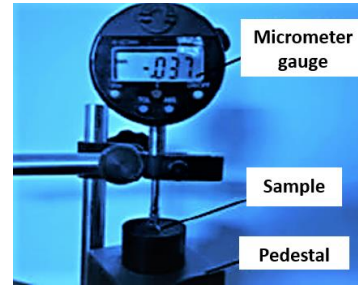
Equipment utilized for measurement of workpiece's removal depth
